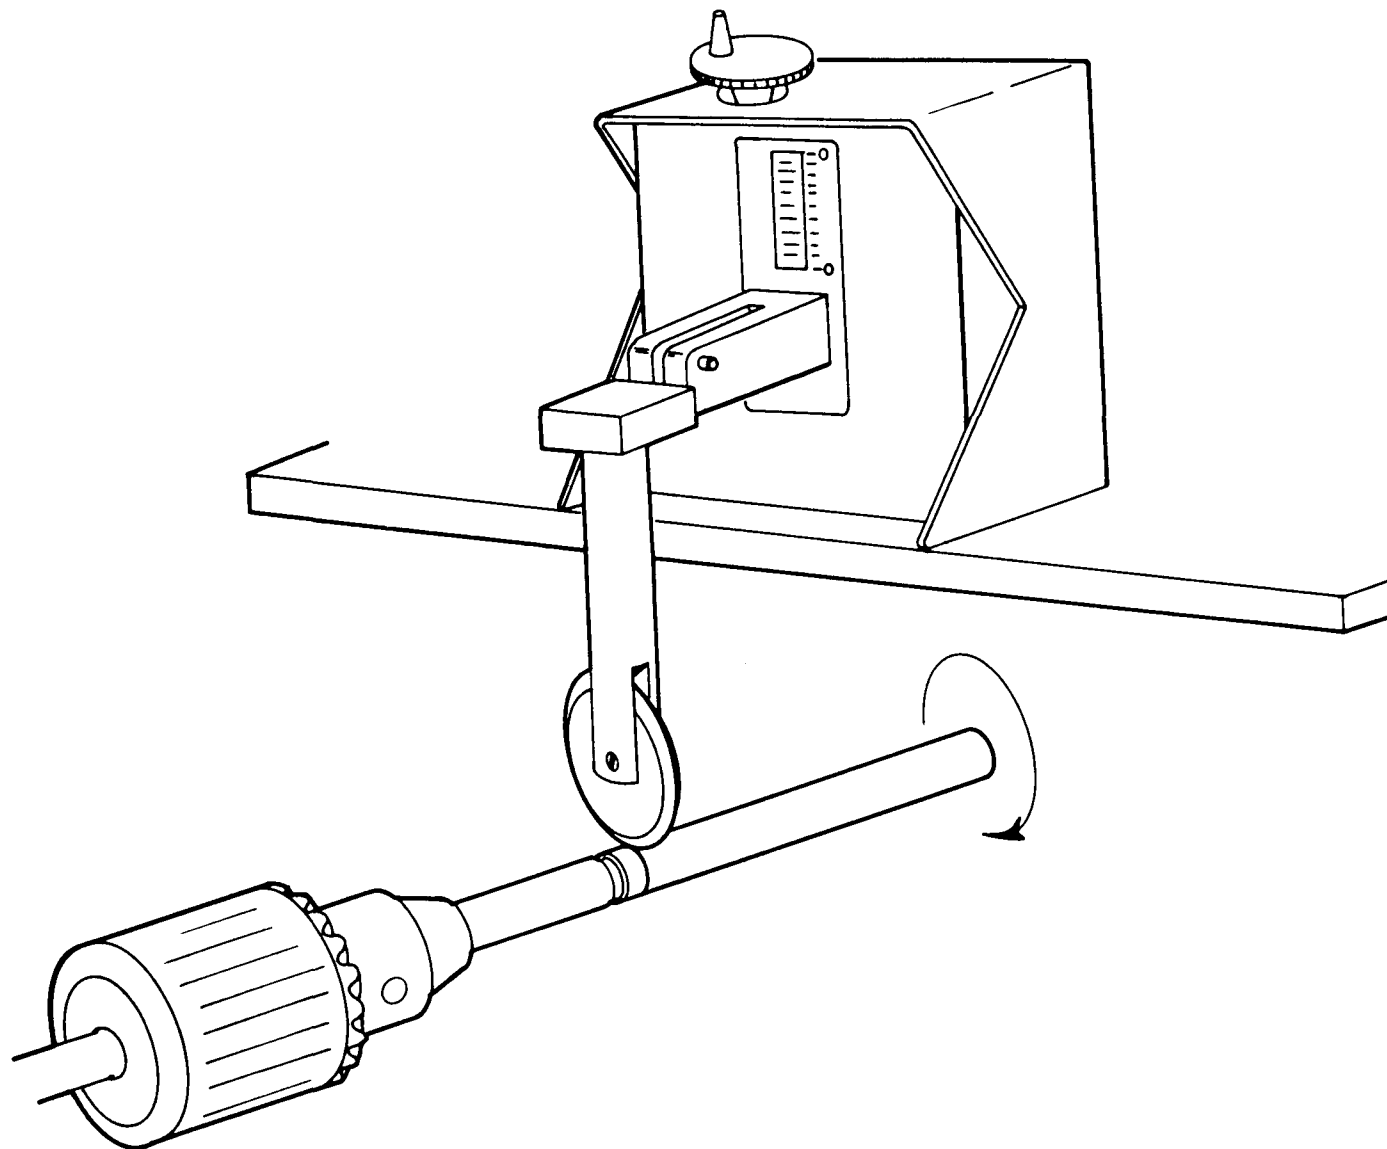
Schematic of Overlapping Spot Weld Apparatus
